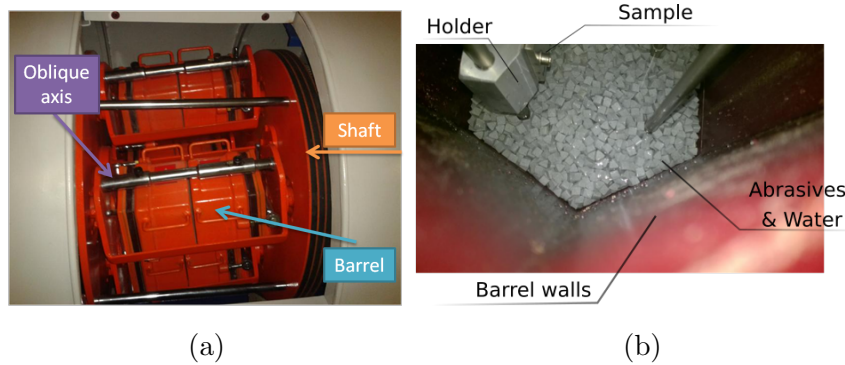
Photographs of CBP machine: a) main elements, b) inside of barrel.
